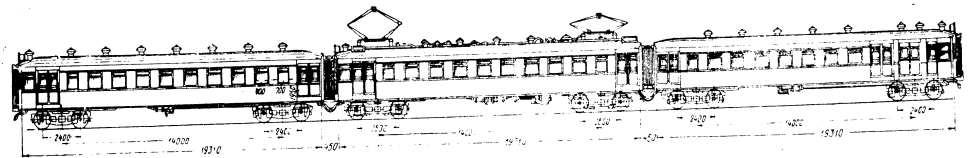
Basic dimensions of the three-car unit with "S_d" series motor-car.
